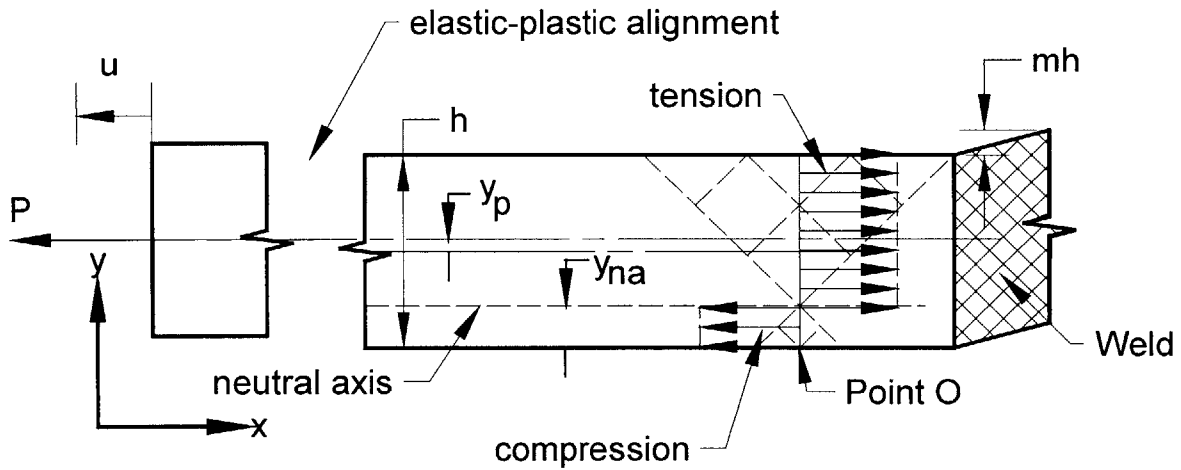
Free-body diagram of weldment. (Cross-sectional view)
